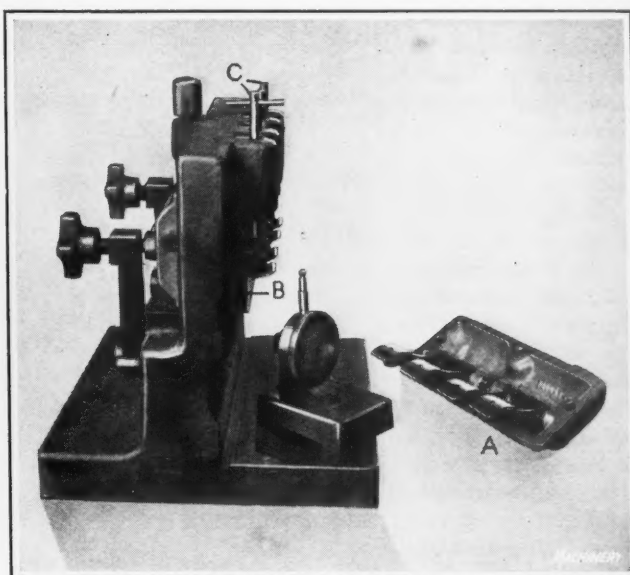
Inspector's Gage and Test Blocks employed for gaging the Ground Cheek of Valve Followers
